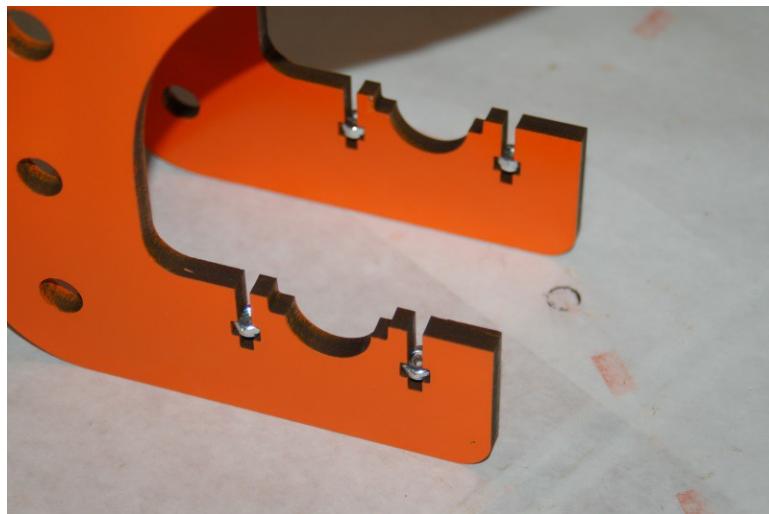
Nylon lock nuts installed in the extruder mount.
